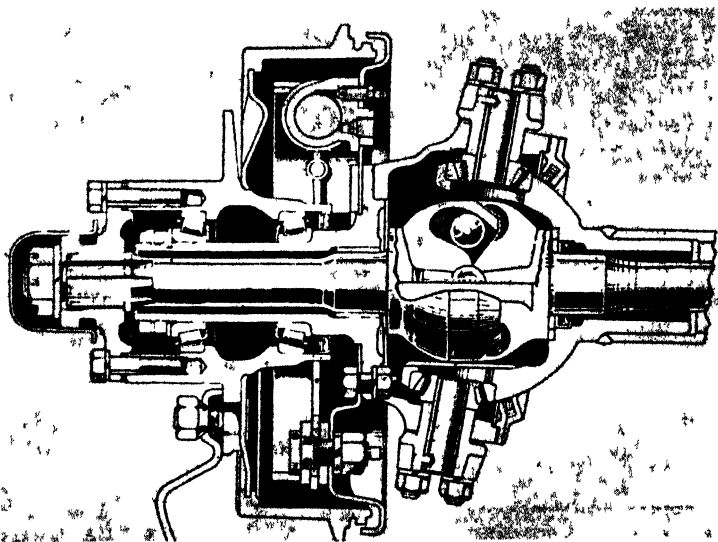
WHEEL END OF DRIVING FRONT AXLE OF WILLYS-BUILT "JEEP"
